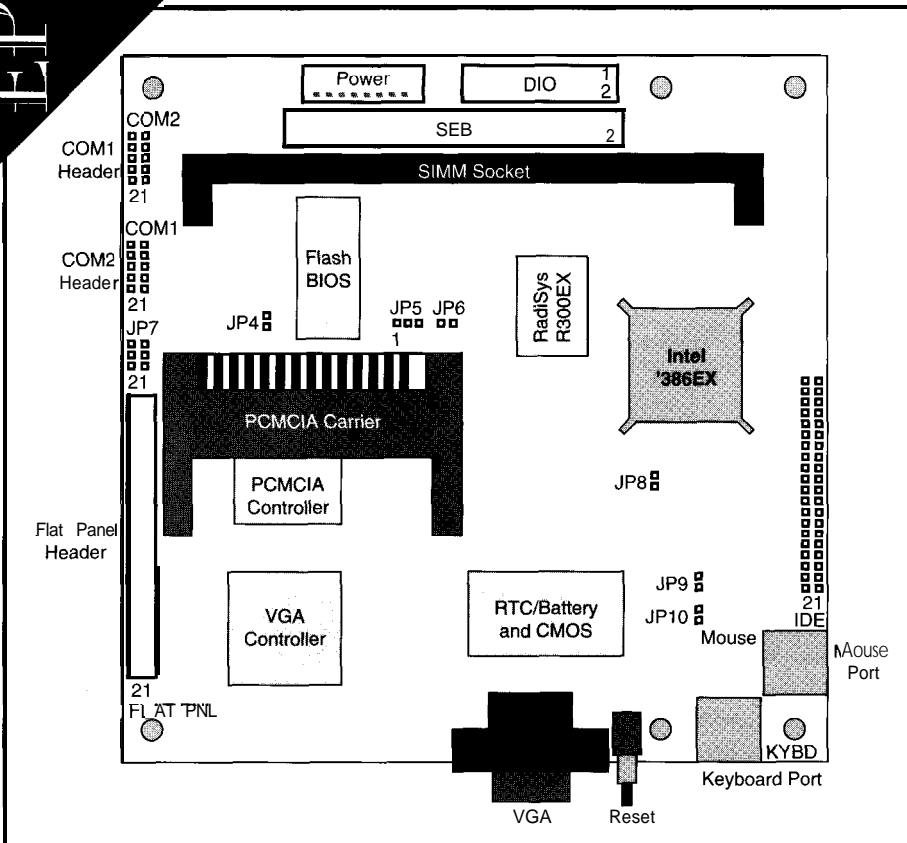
The placement of the primary components on the EXPLR1/RadiSys EPC-4 1 board shows the board's building blocks.
